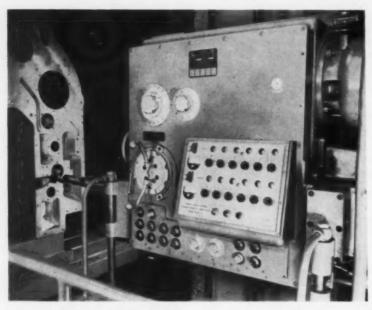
Precision numerical dial and tape panel on headstock of machine shown in Fig. 1
